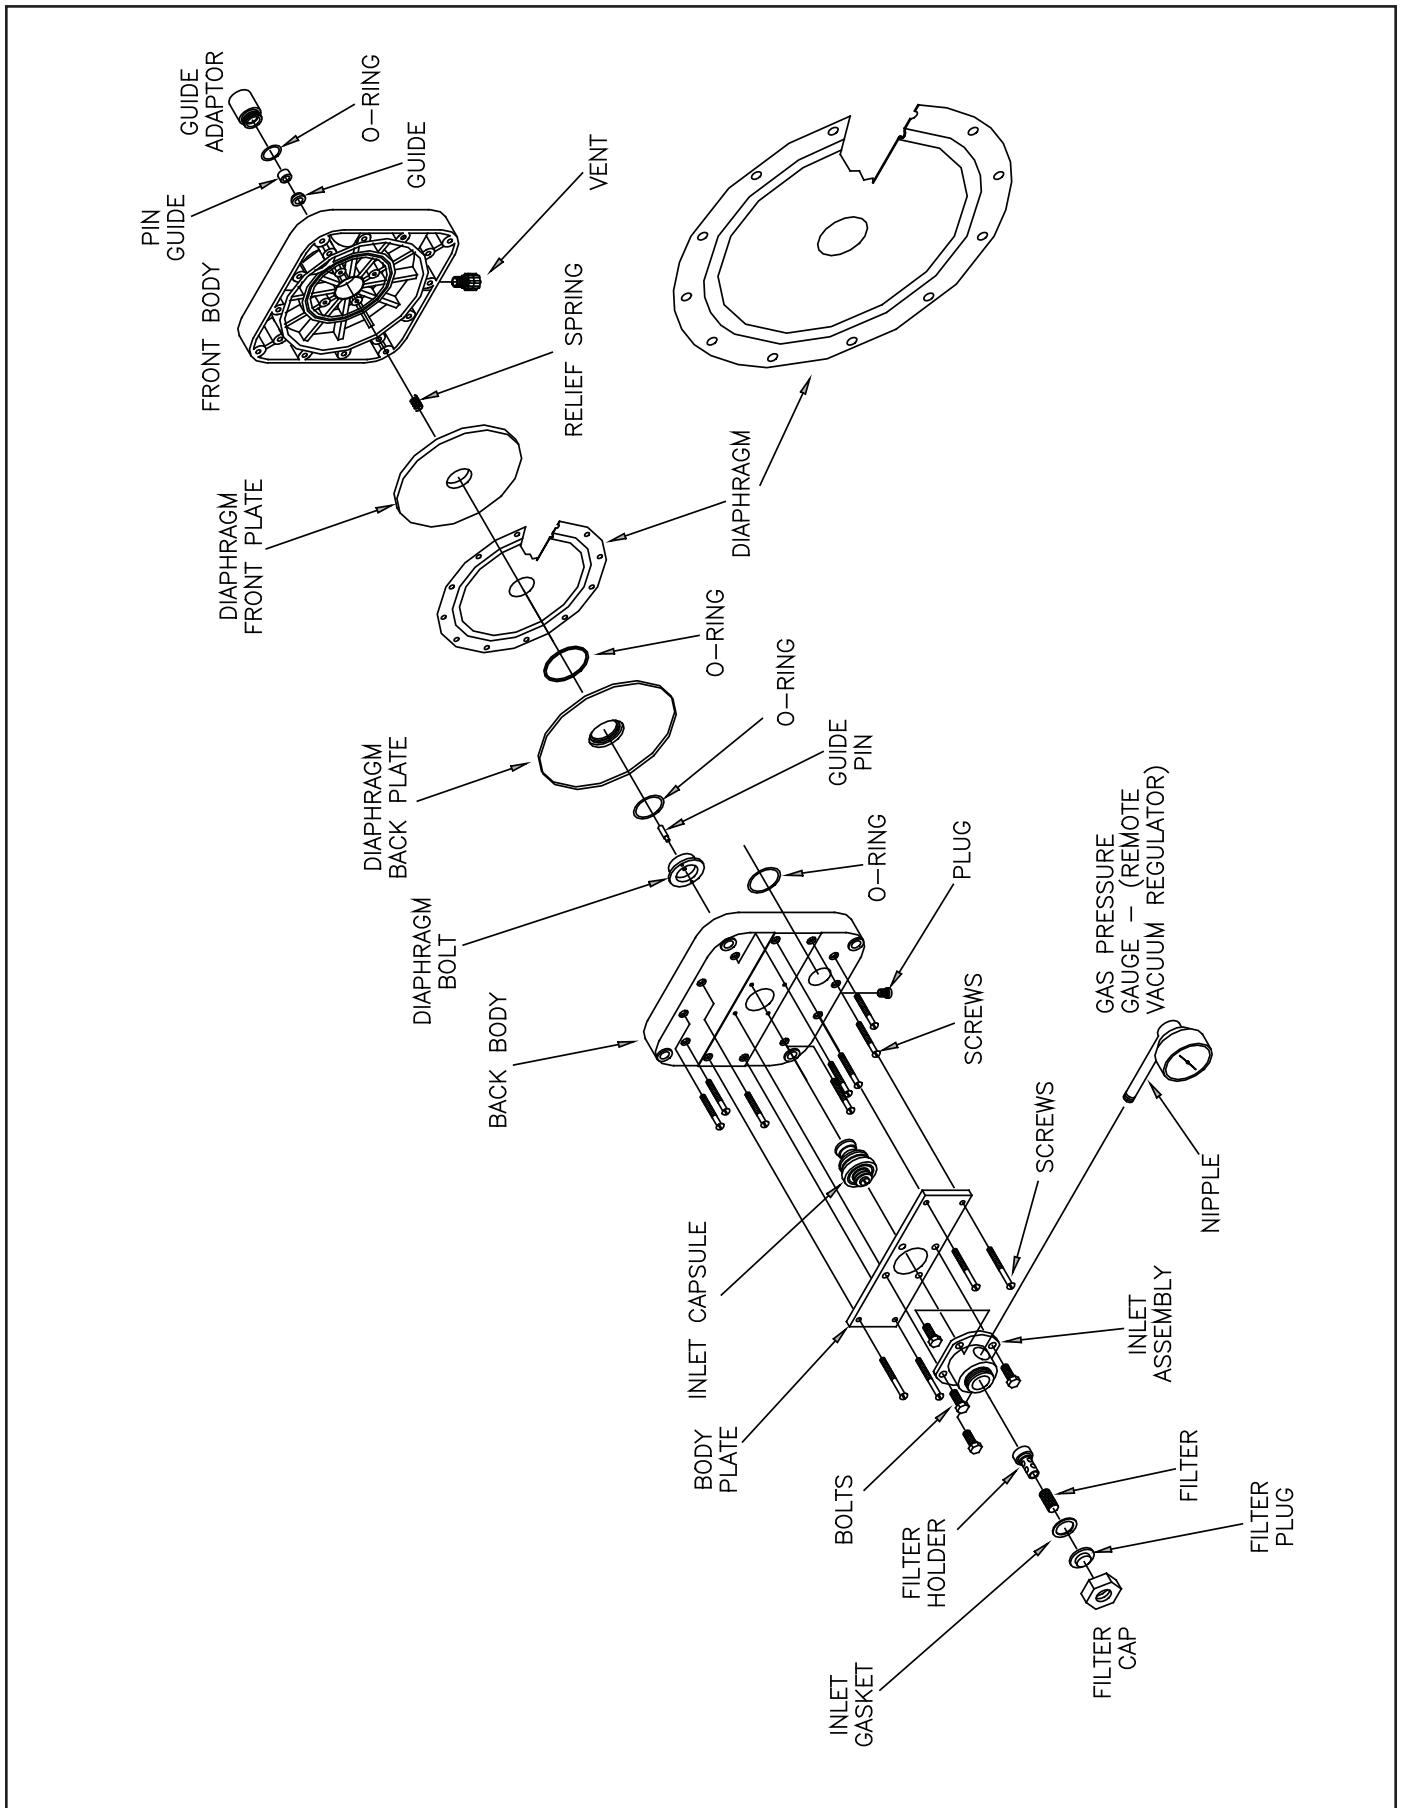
8000 & 10,000 (150 & 200 kg/h) Vacuum Regulator Assembly
